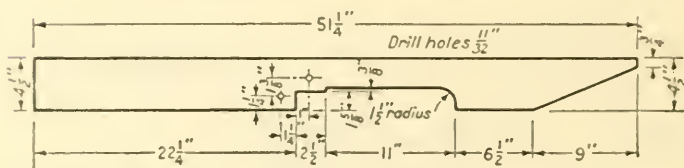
Upper special platform board, Massey-Harris corn binder
